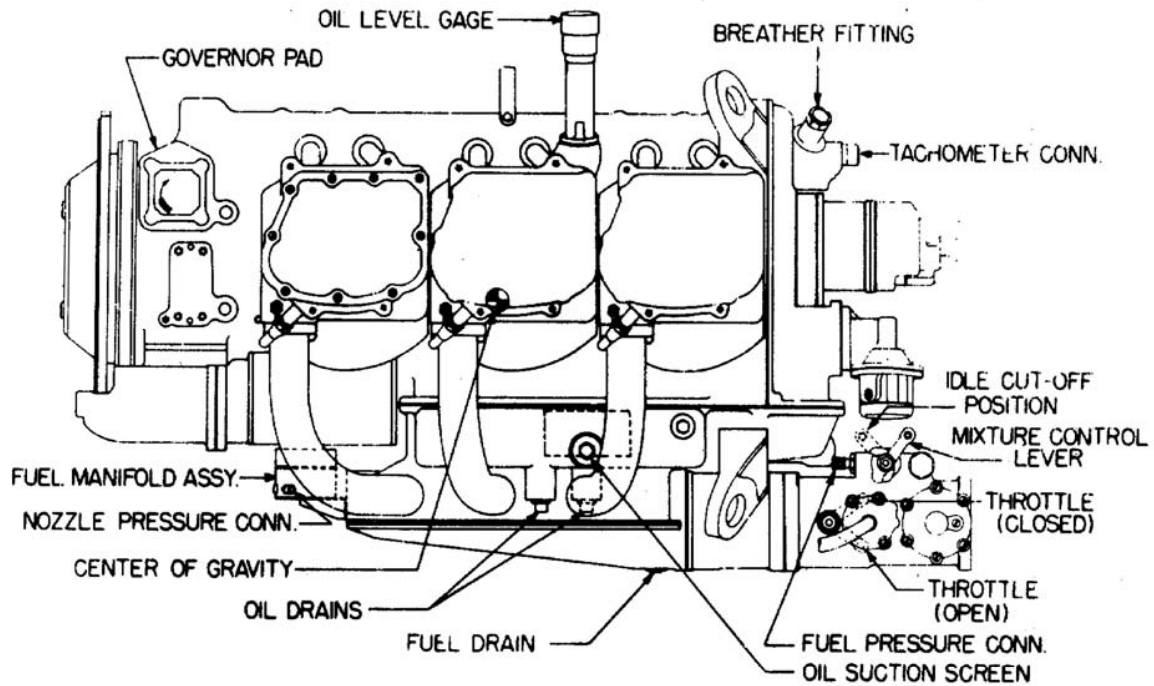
Installation Drawing – Left Side View – IO-540-B, -E
